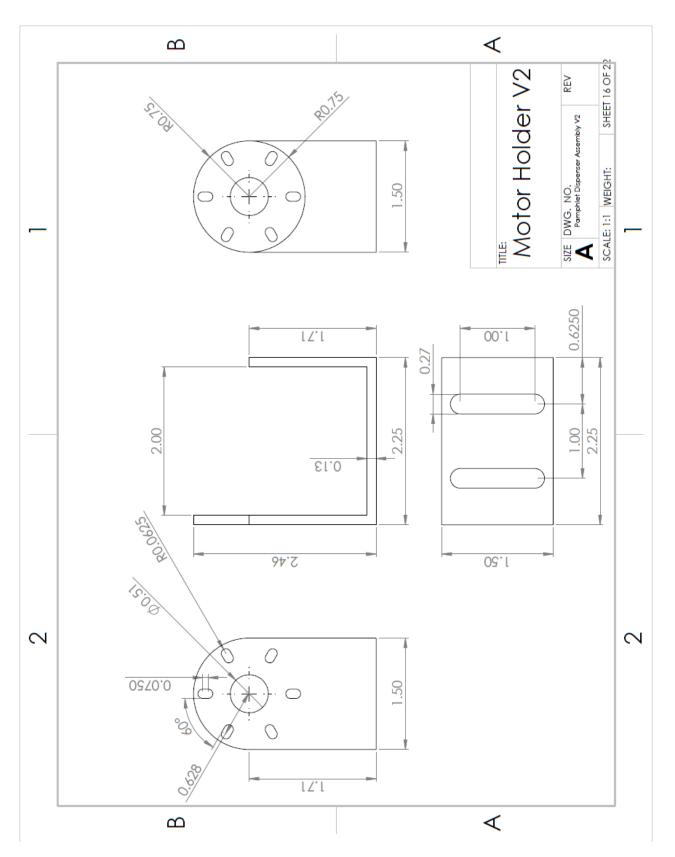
Pamphlet Dispenser Motor Holder V2 Drawing (not to scale)
